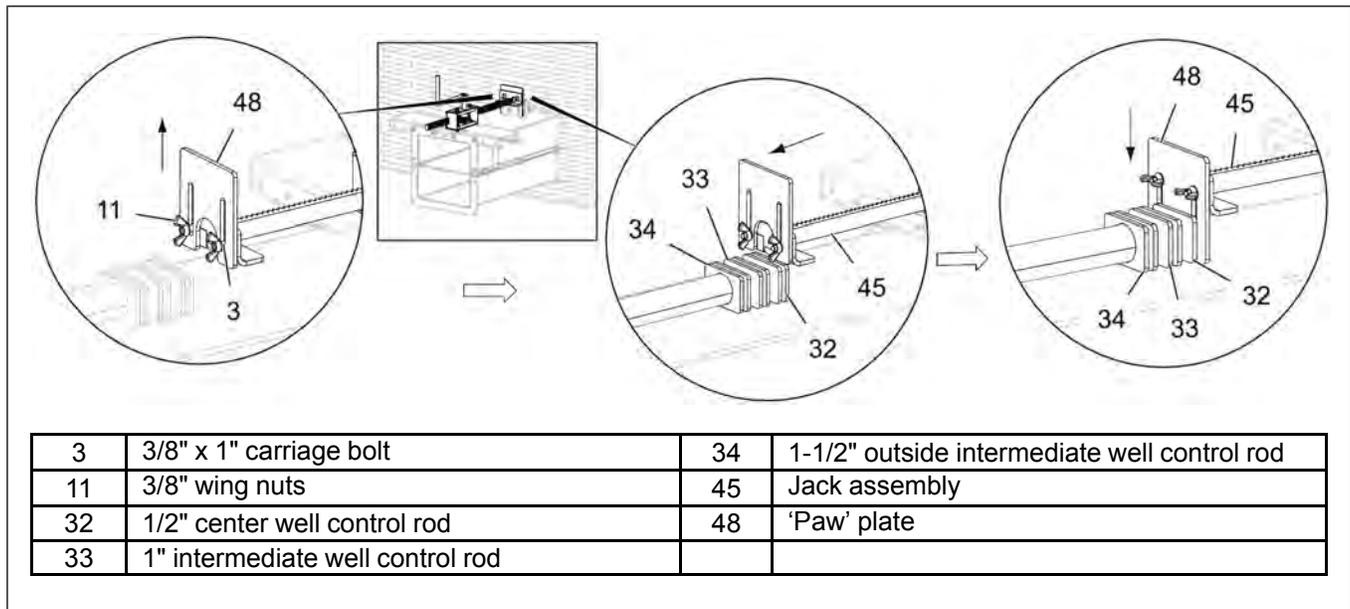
Installing the jack mounting brackets and side brackets to the conveyor (head end)
